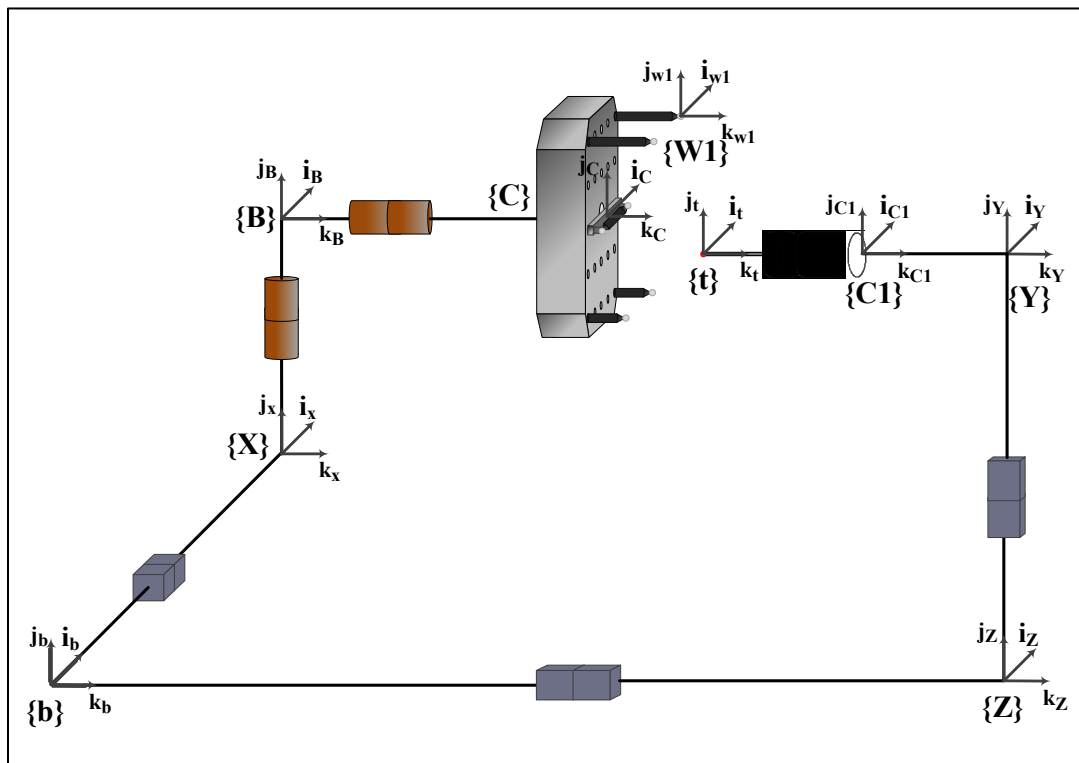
Nominal kinematic model of the wCBXbZY(C1)t five-axis machine tool
